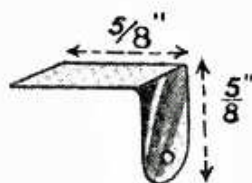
The propeller bracket, with hole to take propeller spindle.
